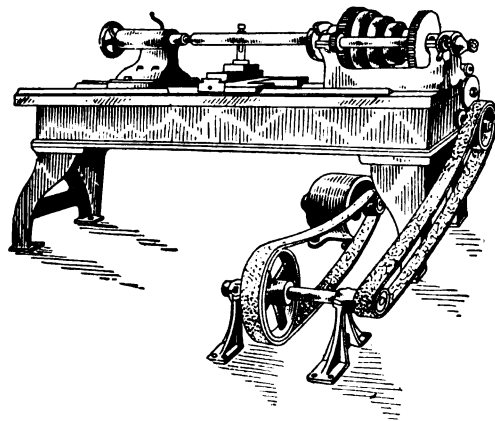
RIGGING UP TO CUT A "QUICK" LEAD IN THE LATHE
